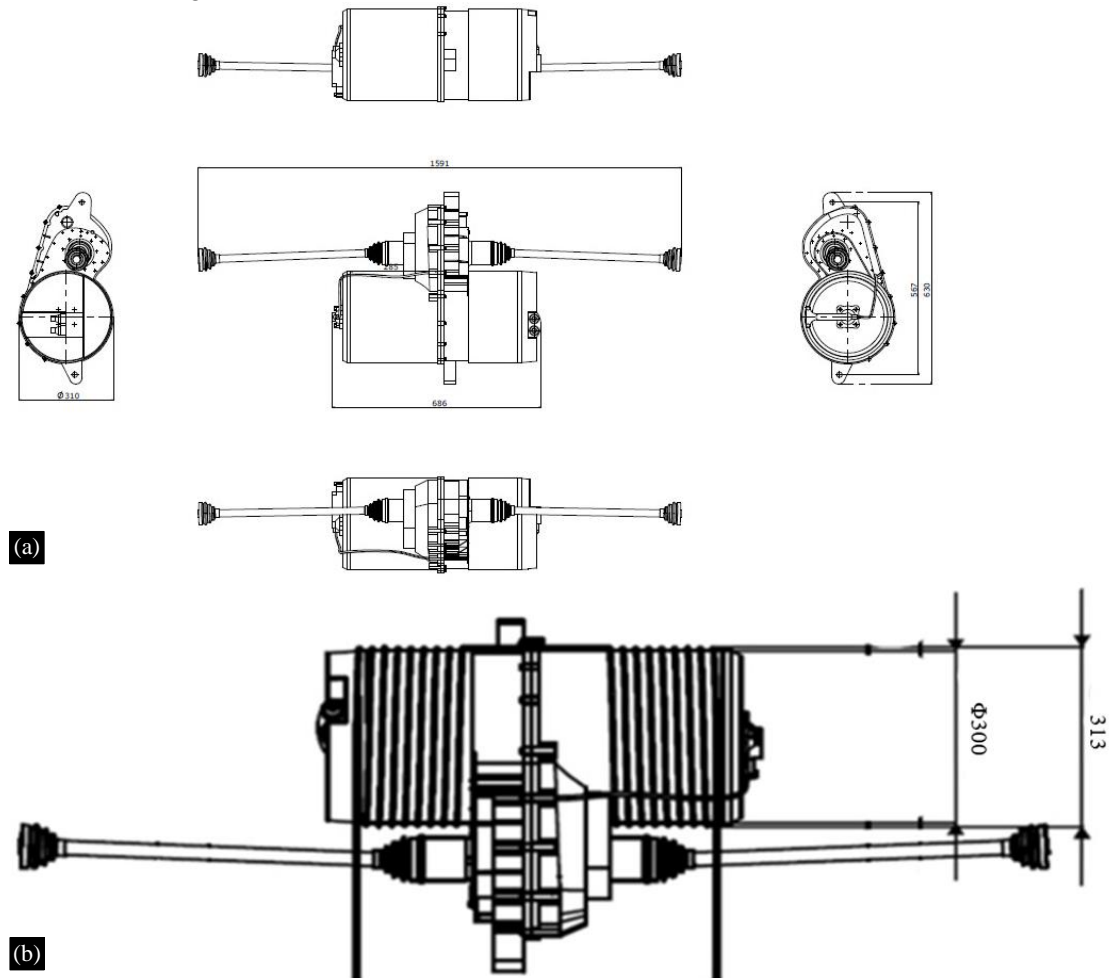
Dimensions of the (a) Motor (b) Motor with coolant tube.
